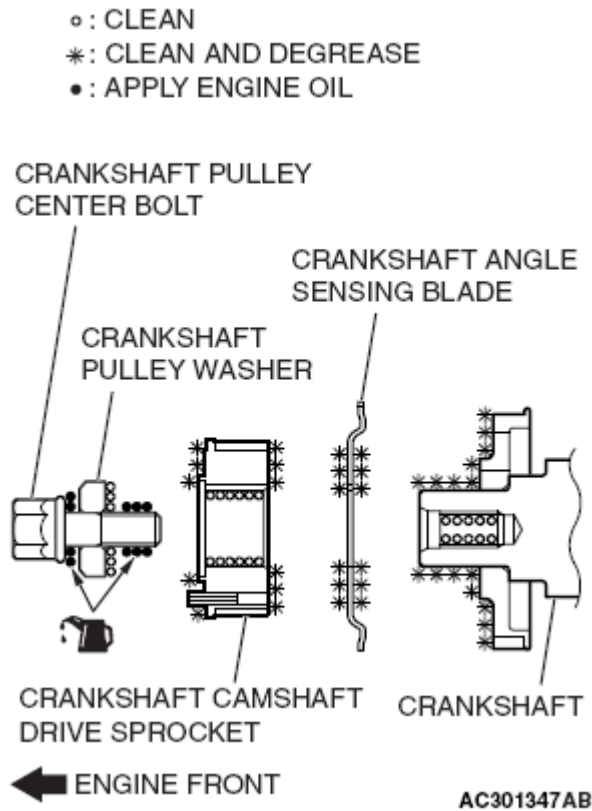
Crank Shaft Pulley Center Bolt Engine Oil Applying Area
